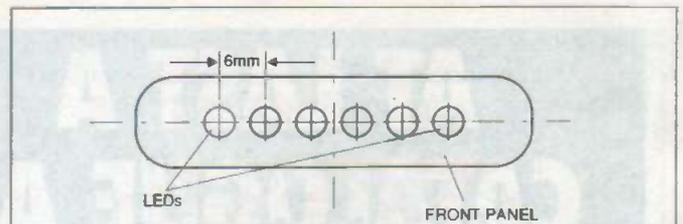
guide to drilling the LED holes - 3mm diameter - in the front panel
